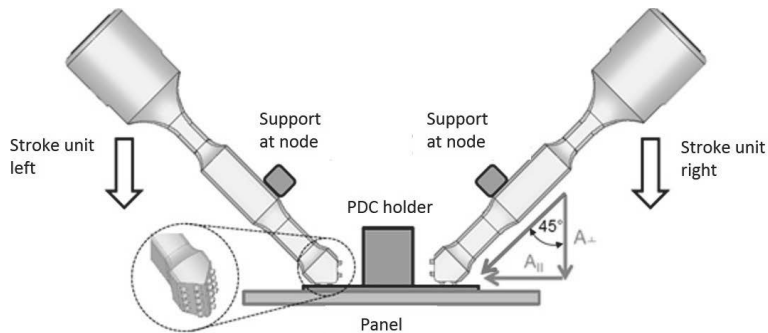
45° sonotrode welding (courtesy of the PPtech company)
